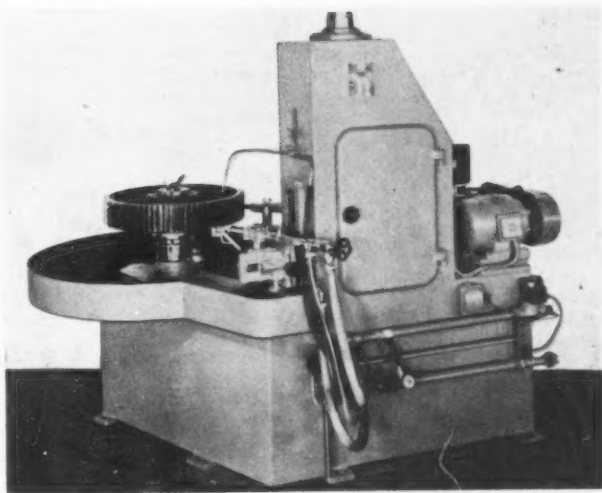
Peddinghaus Type ZV.1000 Flame Hardening Machine for Large-diameter Gears
